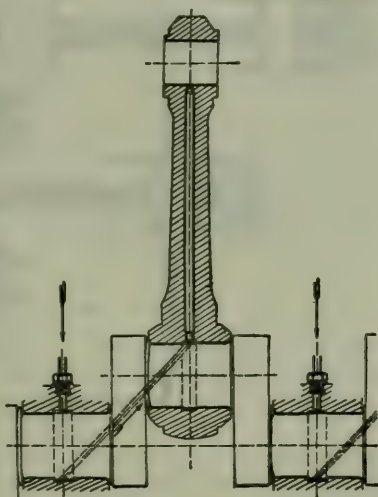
System of lubrication especially adapted to high-speed engines.
